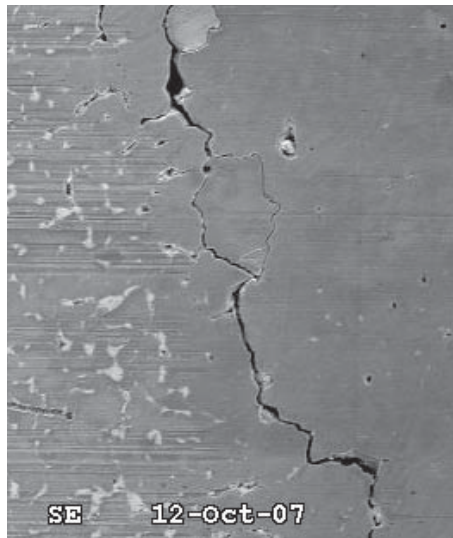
Fracture of magistral type (on the surface of the bearing) almost perpendicular to the circular direction of the bush for the lining made of CuPb22Sn4 alloy (magnified 100x)
